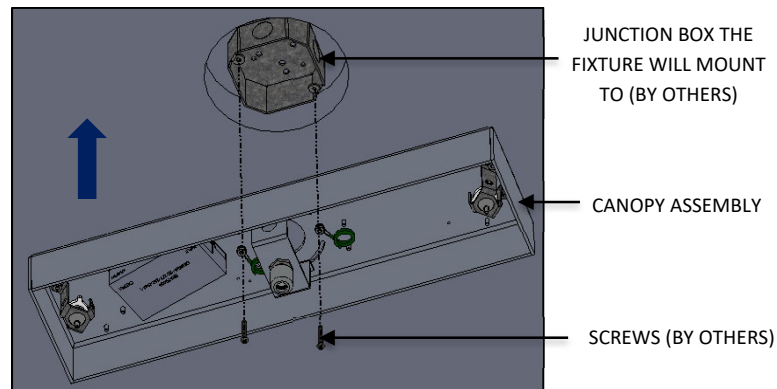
BOTTOM VIEW SHOWING CANOPY ASSEMBLY INSTALLATION
